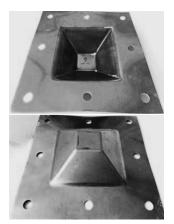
A lubricant, the views of the sample having 0.5 mm step size and 1st tool path parameters
